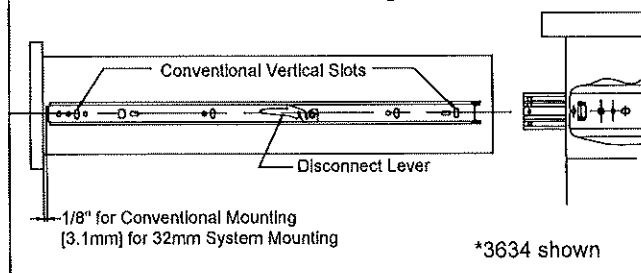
3634EC Drawer Member Installation – Conventional Mounting
